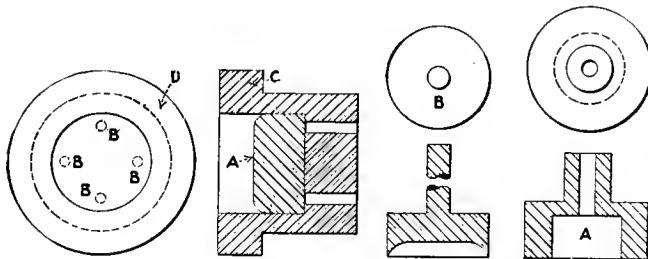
BOTTOM DIE USED FOR DRAWING THE POWDER-CUP BOTTOM
